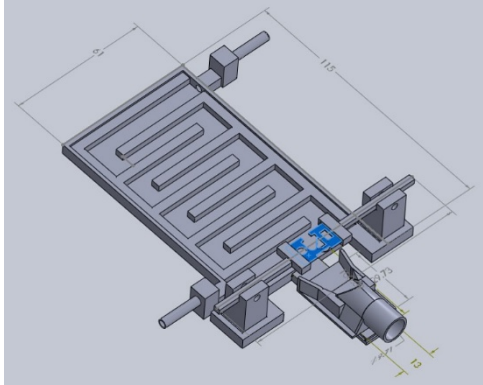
Integrated system with the top cover of the base plate removed to show the serpentine water channel. Parts were 3D printed and designed in SolidWorks®. Dimensions are in mm [15].
